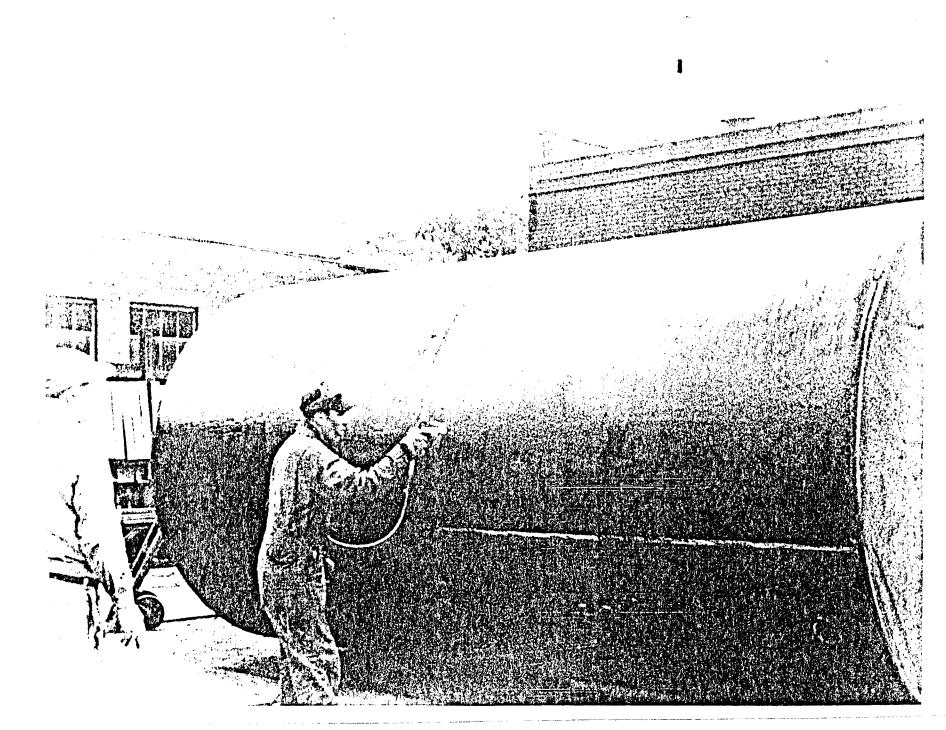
Applying Mastic Coal Tar Coating Using Spray Technique (Photograh Courtesy The Tapecoat Company)
